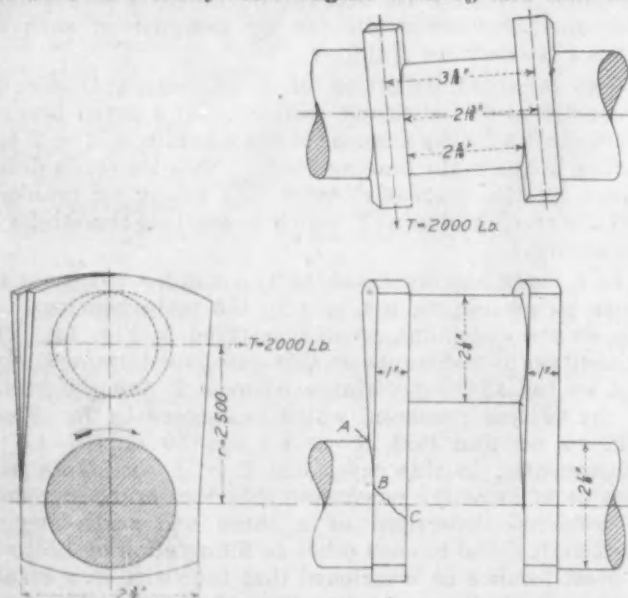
PART OF CRANKSHAFT ILLUSTRATING DEFLECTION OF CRANK-CHEEKS
